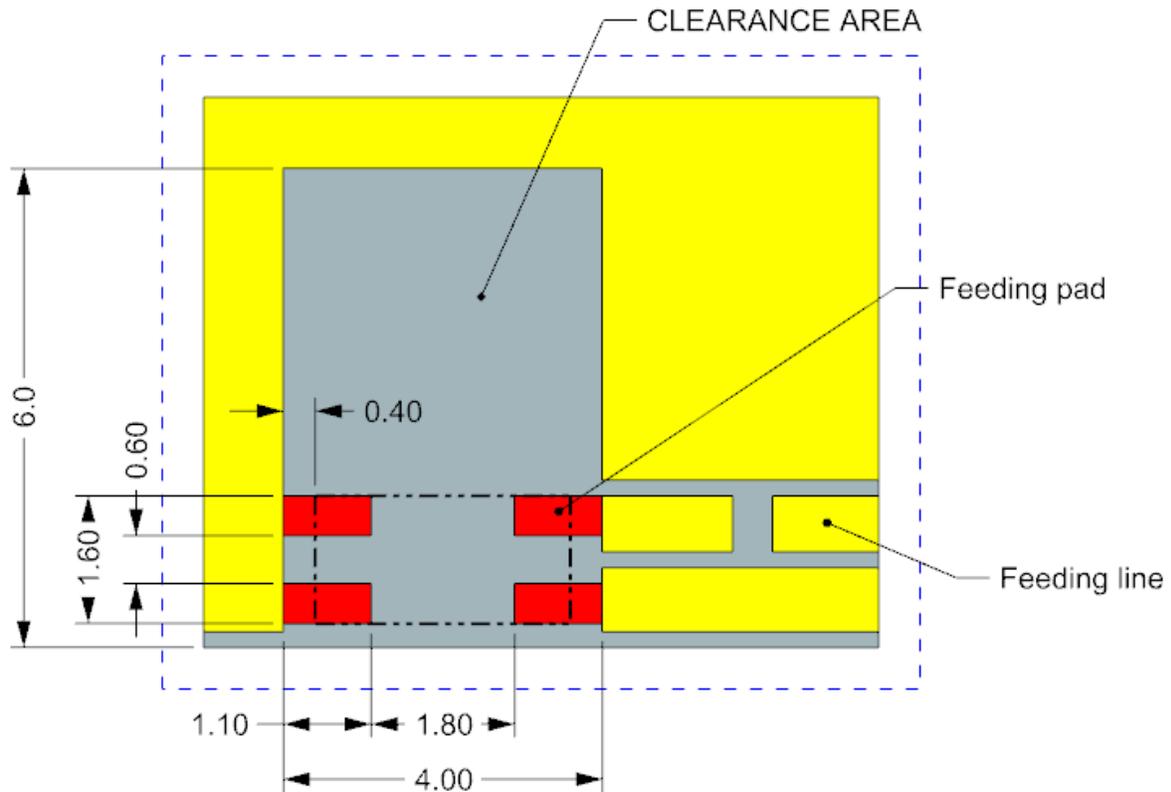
PADS OF PRODUCT FOR SOLDERING
